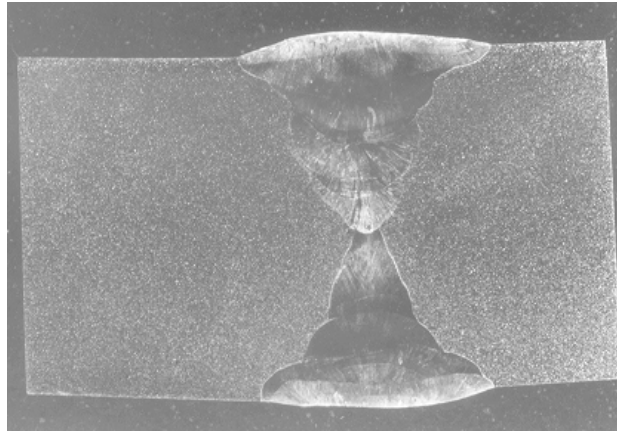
GTA welded joint of AISI 316 stainless steel (x3.3)
